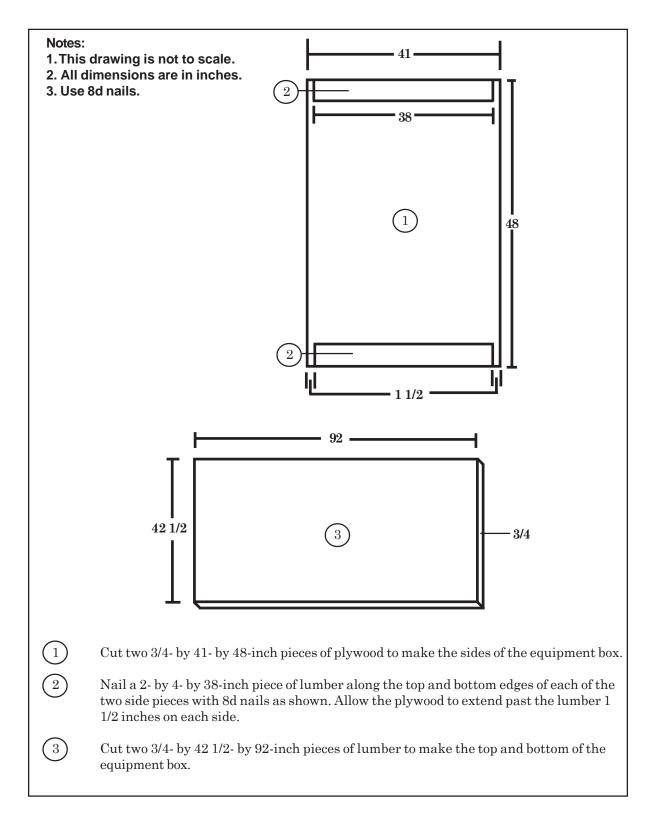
Equipment Box 3 Sides, Top and Bottom Constructed
